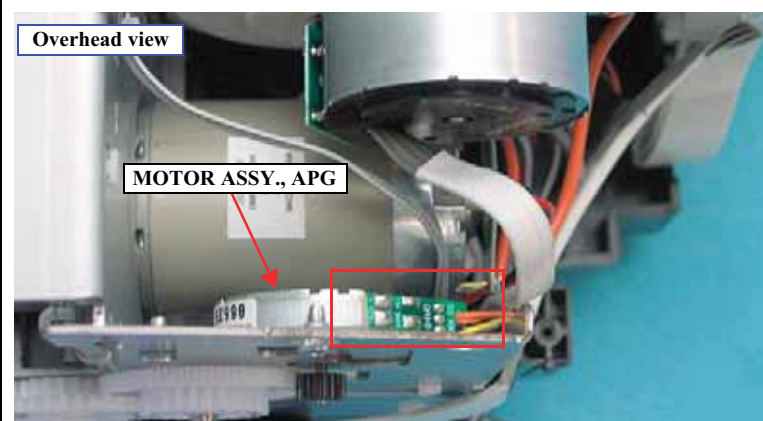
Releasing the MOTOR ASSY., APG cables (2)
